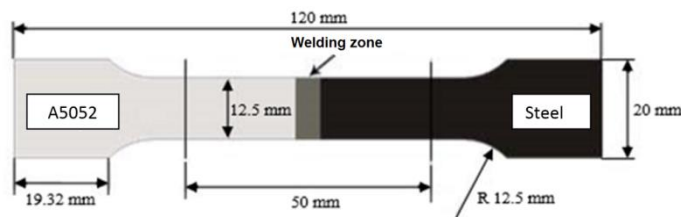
Shape and dimensions of tensile-shear specimen used in this study.
